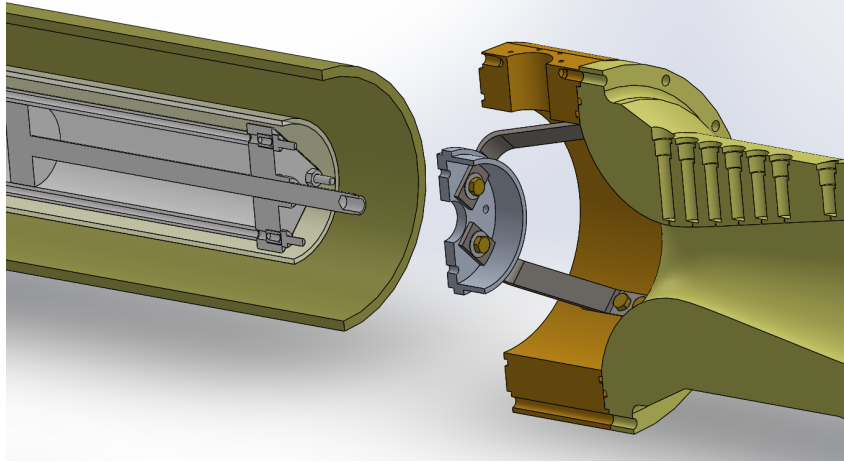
Section view of the end cap, ties, and injector flange installed on the nozzle with the piston assembly in the driver section.
